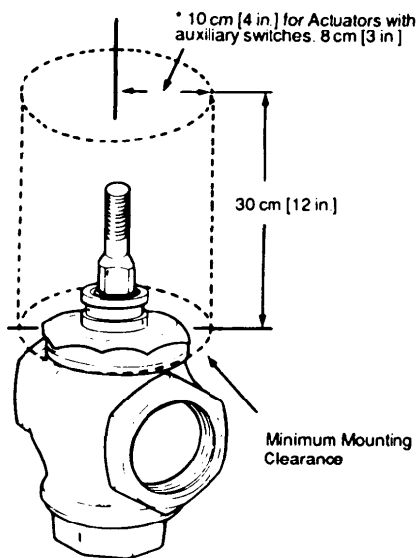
MINIMUM MOUNTING CLEARANCE.
